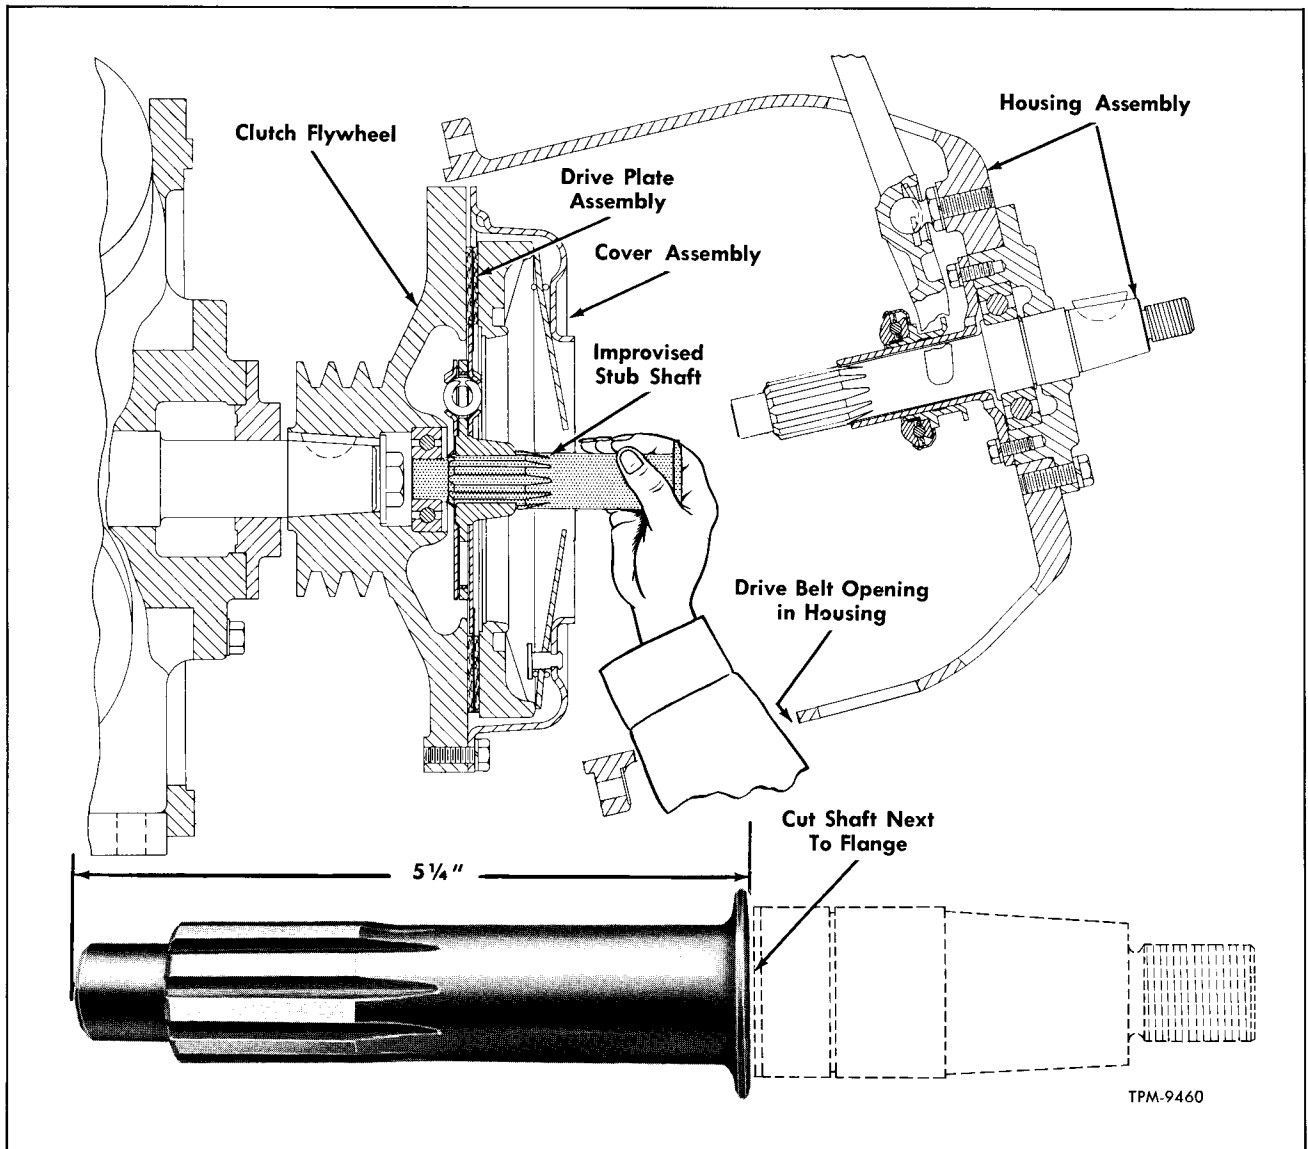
Installing Clutch Drive Plate and Cover Using Alignment Tool (Compressor in Coach)
